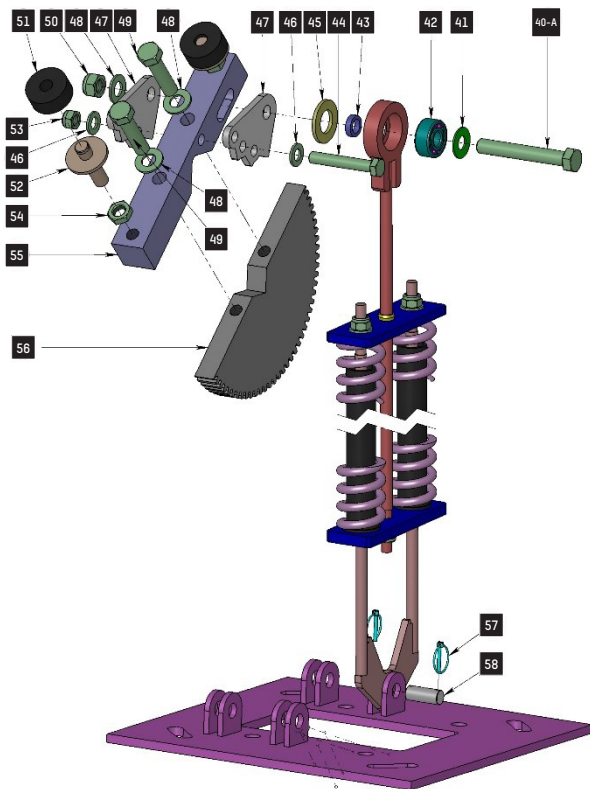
Mounting of a spring assembly (1 to 3 springs)
